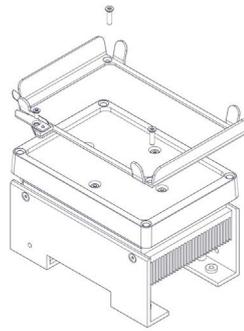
· Assemble the outer frame of flat bottom adapter with 2 screws
